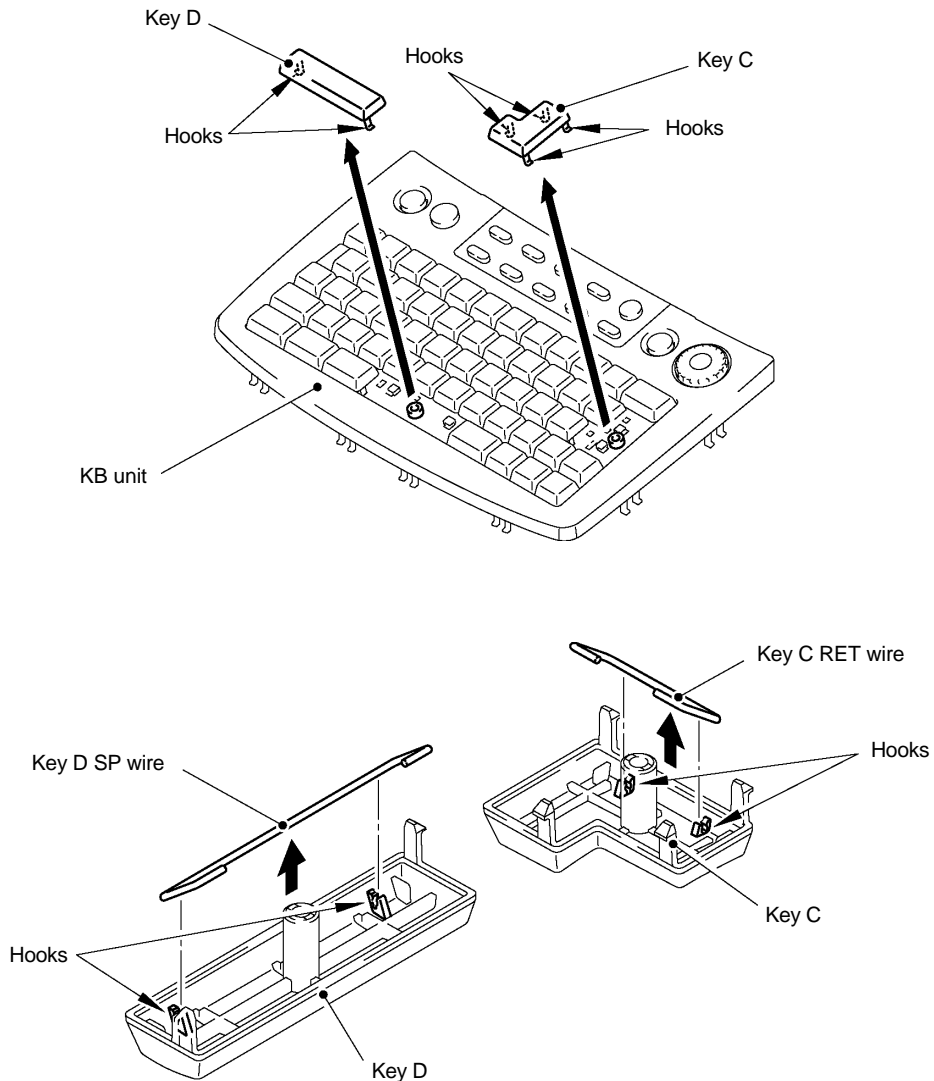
Disassembling the KB Unit/Rubber Key Unit (1)
